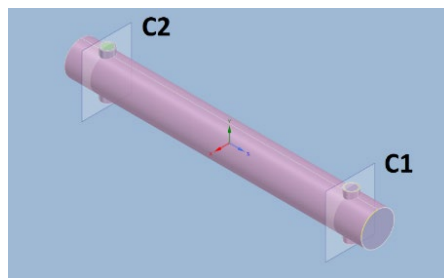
Transverse Inlet/Outlet planes C1, C2.
